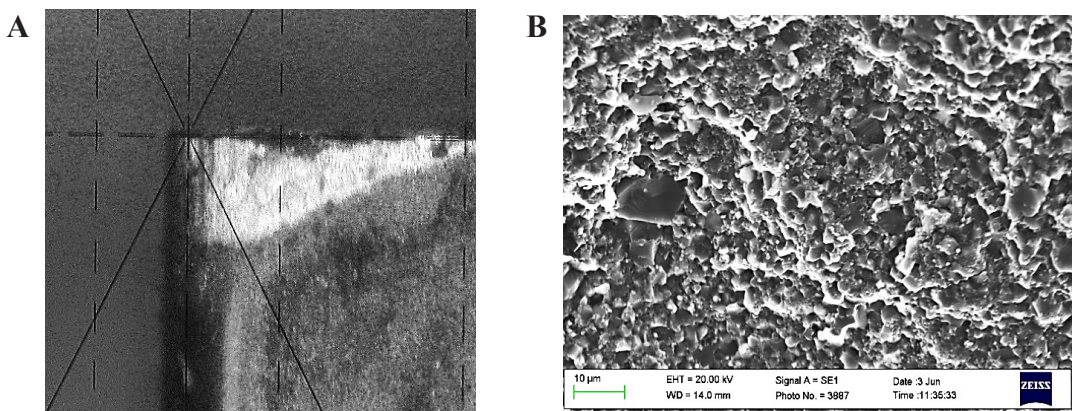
Cutting edge (A) and fracture pattern (B) of a cutting plate of As15-6 composite.
